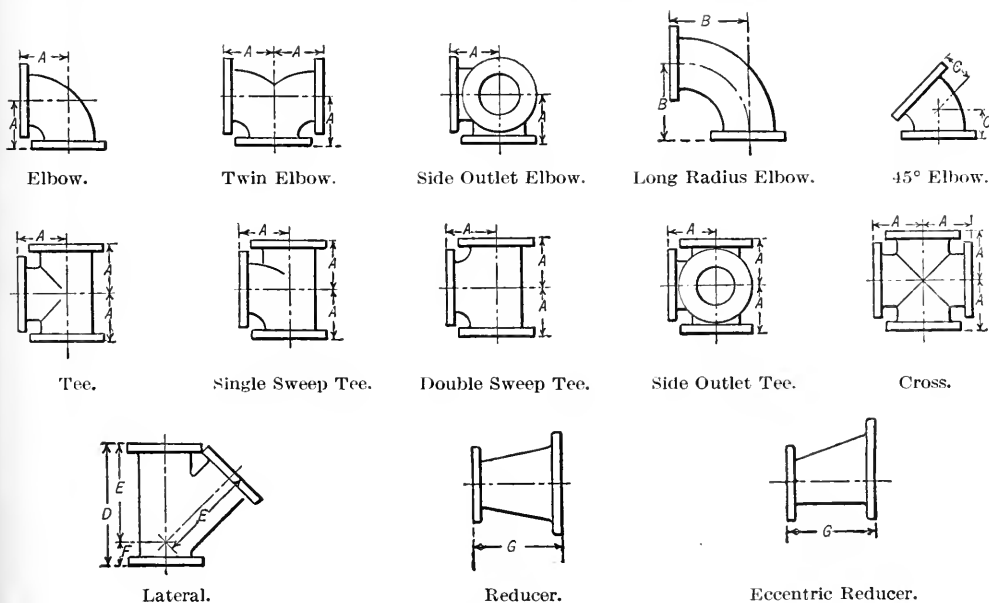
STANDARD AND EXTRA HEAVY FLANGED FITTINGS
